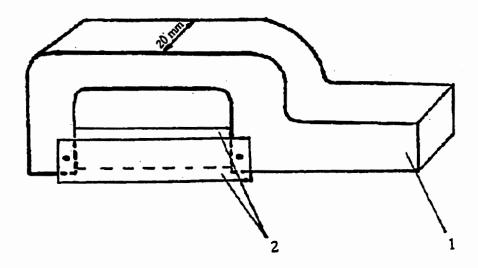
The cutting device ('cuber') used to take samples for the wedge-penetration fracture test; 1- plastic handle, 2- metallic blades.
